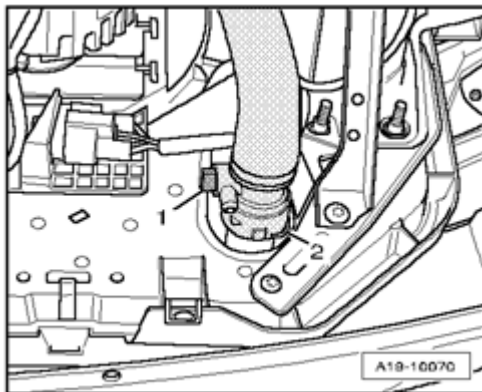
Identifying Spring Clamp, Expansion Hose & Bracket
